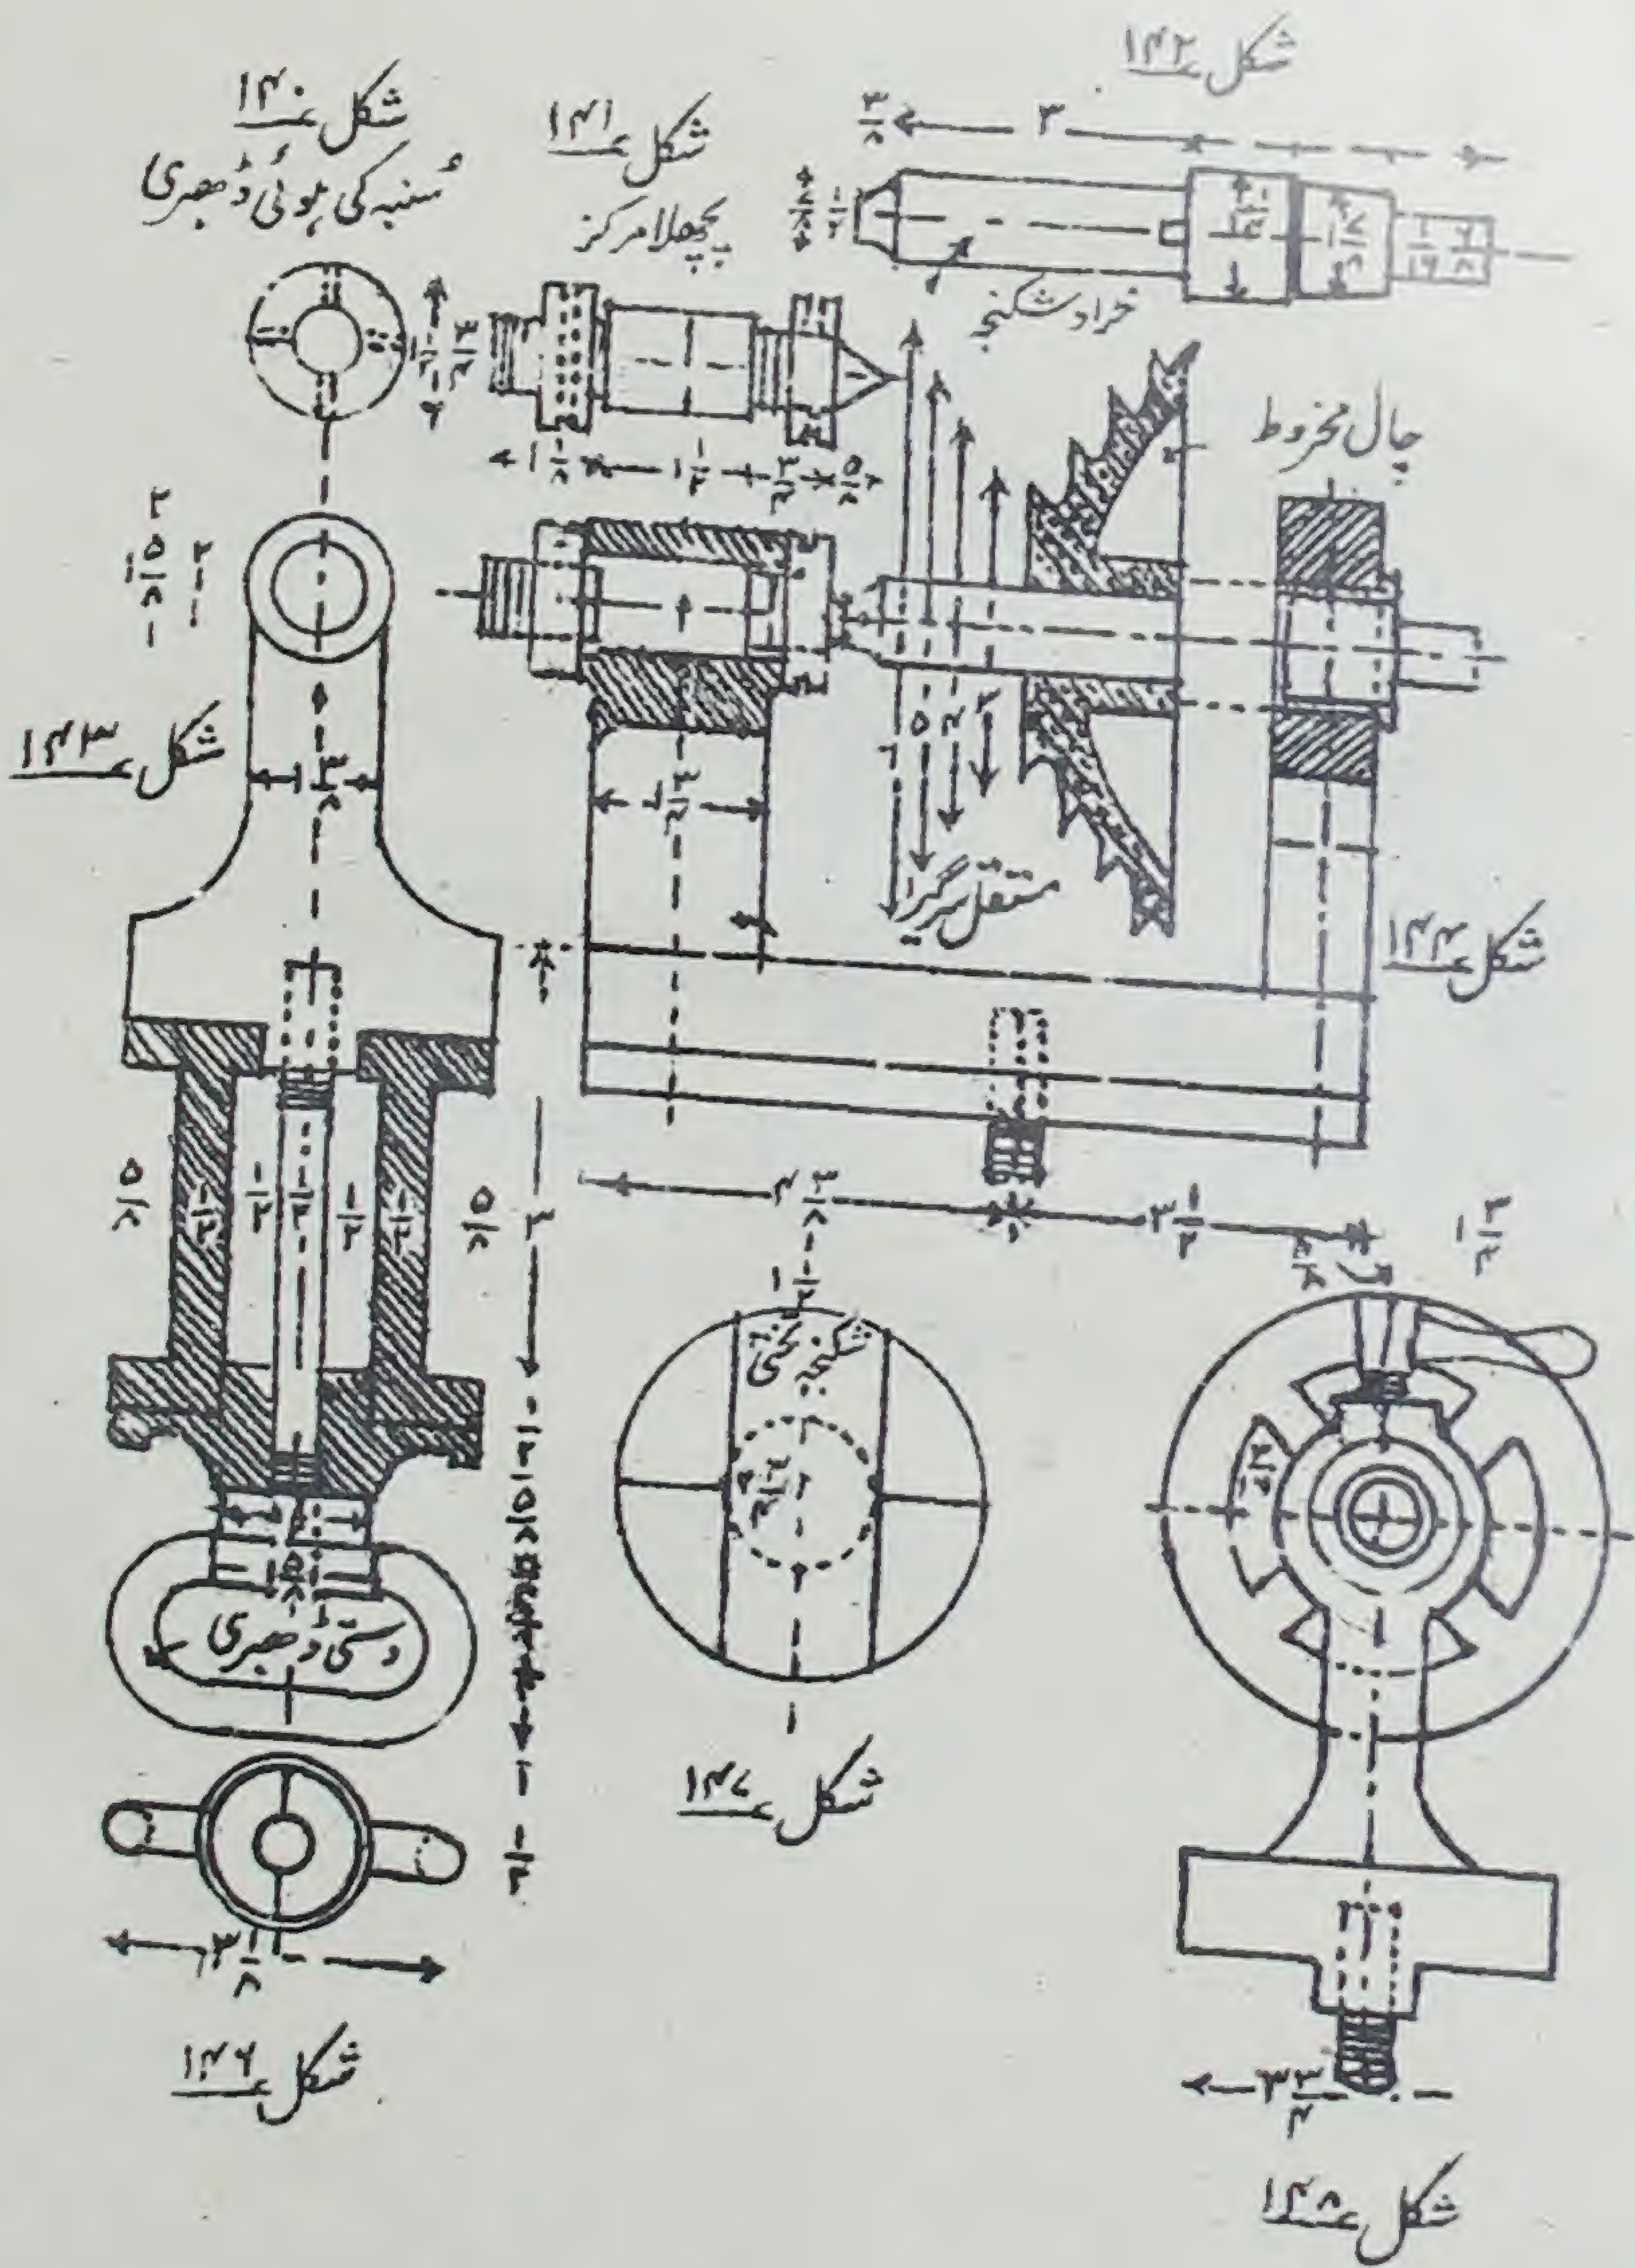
A technical drawing of a vertical component, possibly a valve or a pump part, showing a circular top with a central hole and a flange. Dimensions include a diameter of 2 and a height of 2 1/2.
